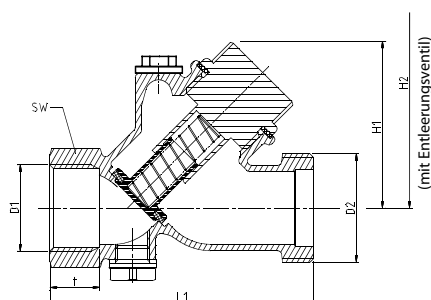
Alwa-R, internal thread on inlet, external thread on outlet
